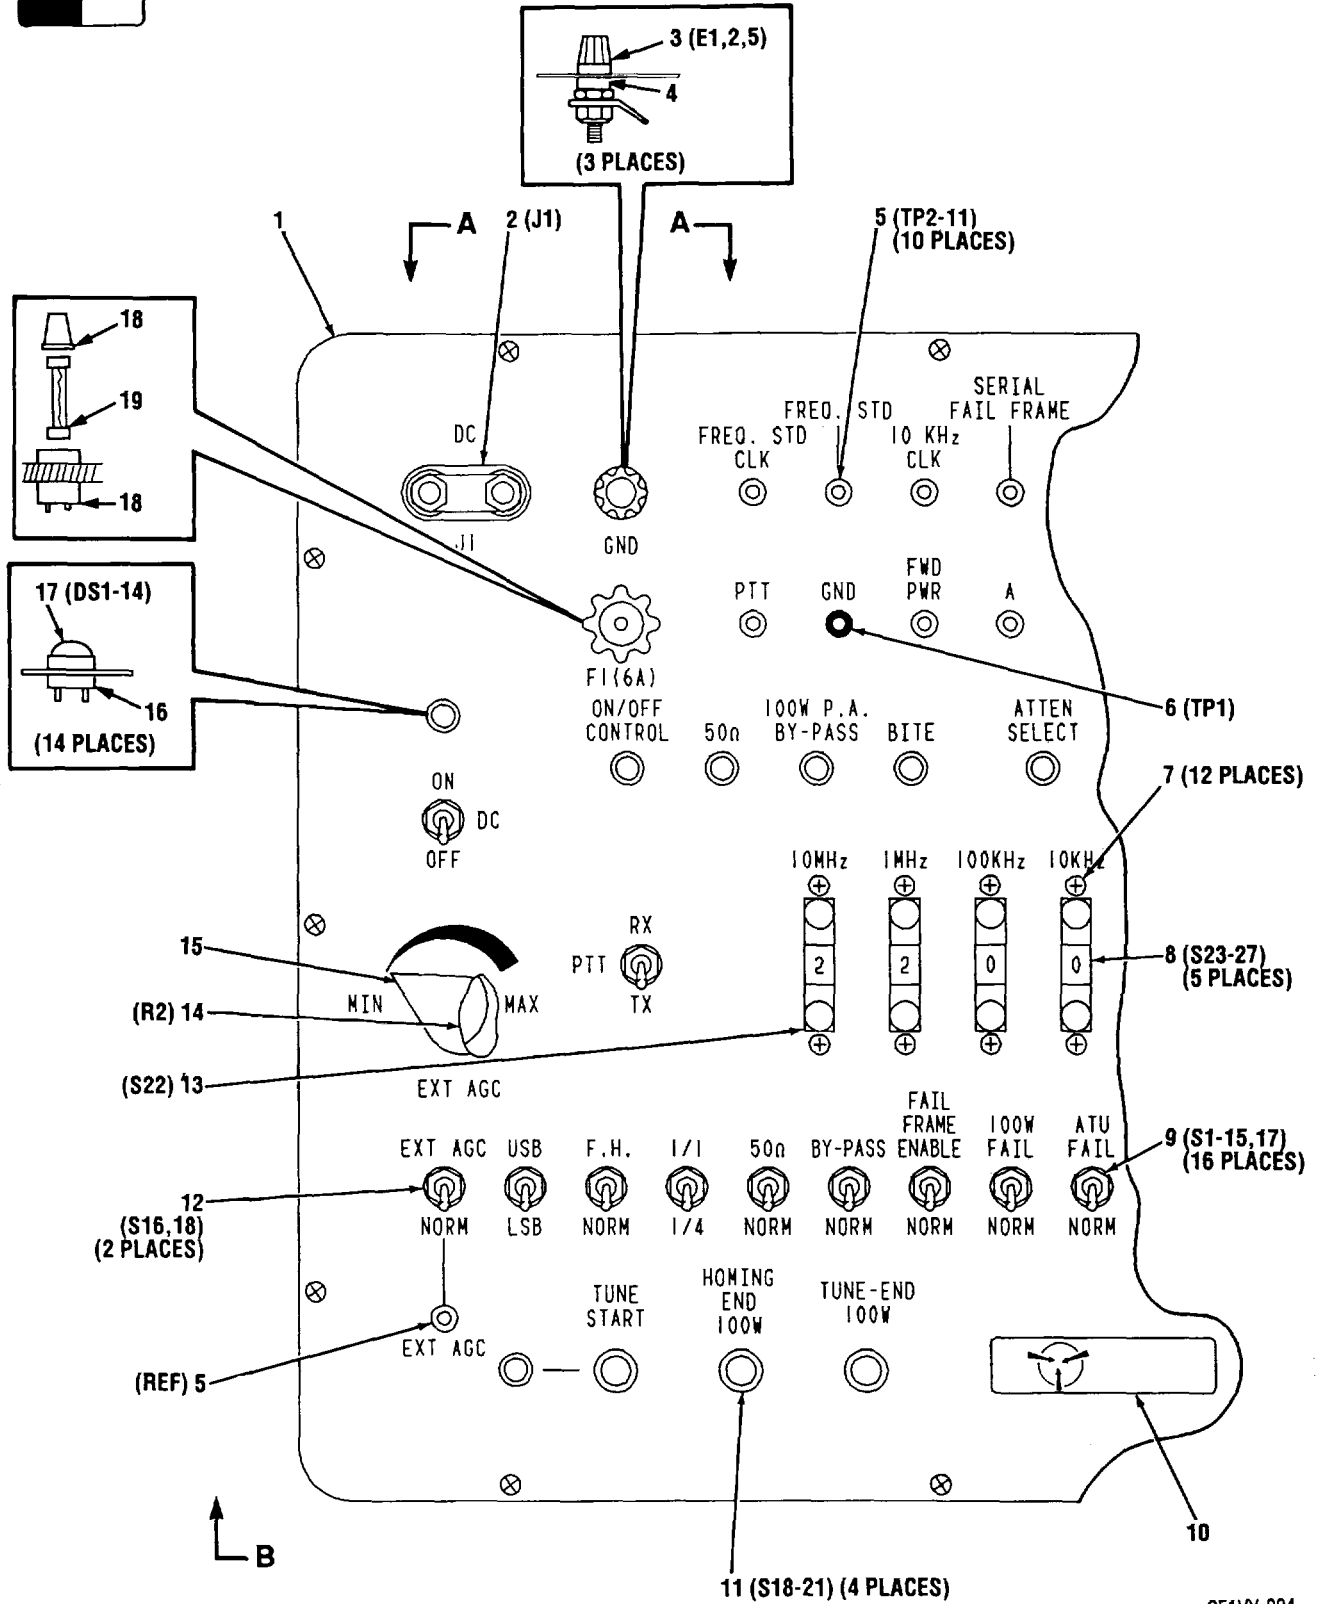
Front Panel Assembly (1-94284.0000/A) (Sheet 1 of 5)
